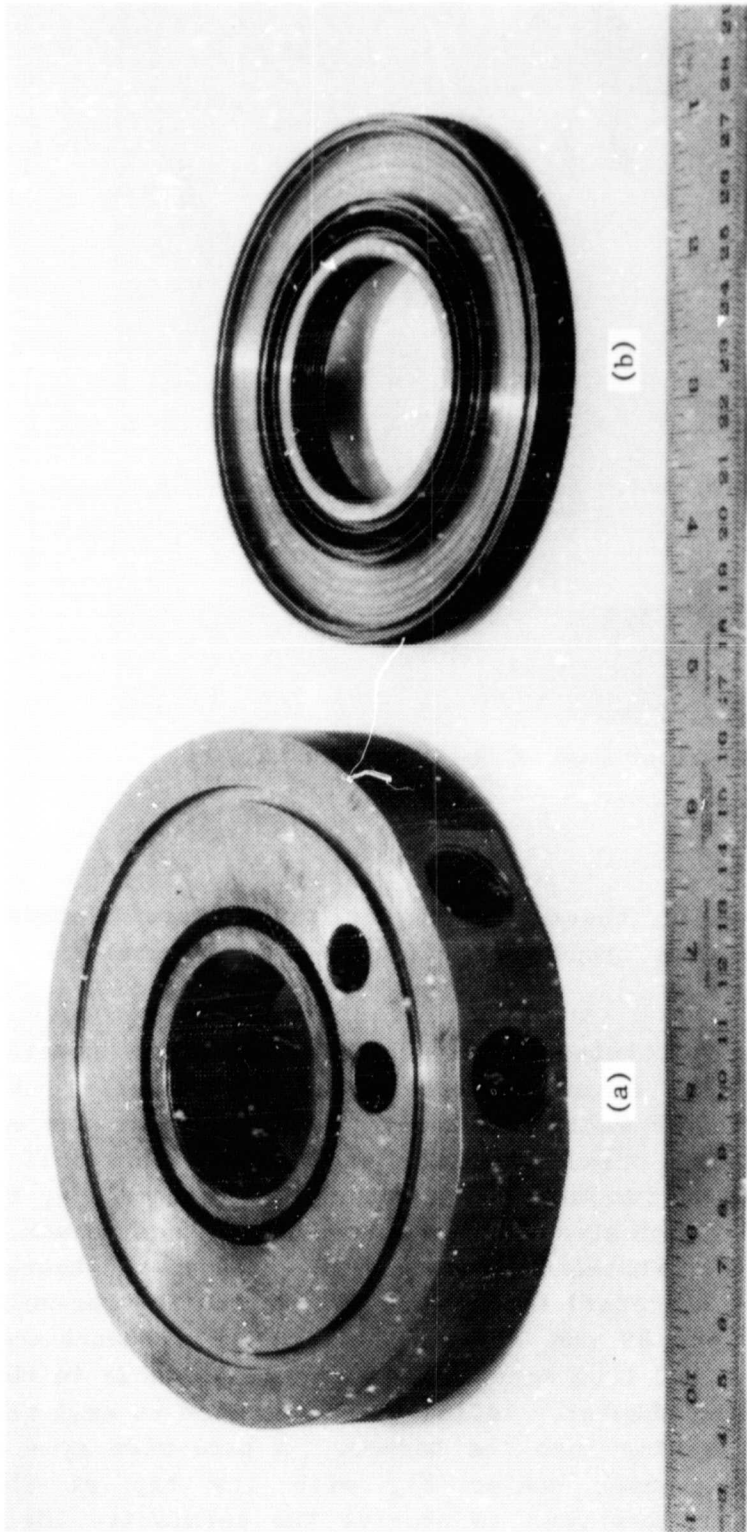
Combustion-Chamber Head and Cooling Channel
